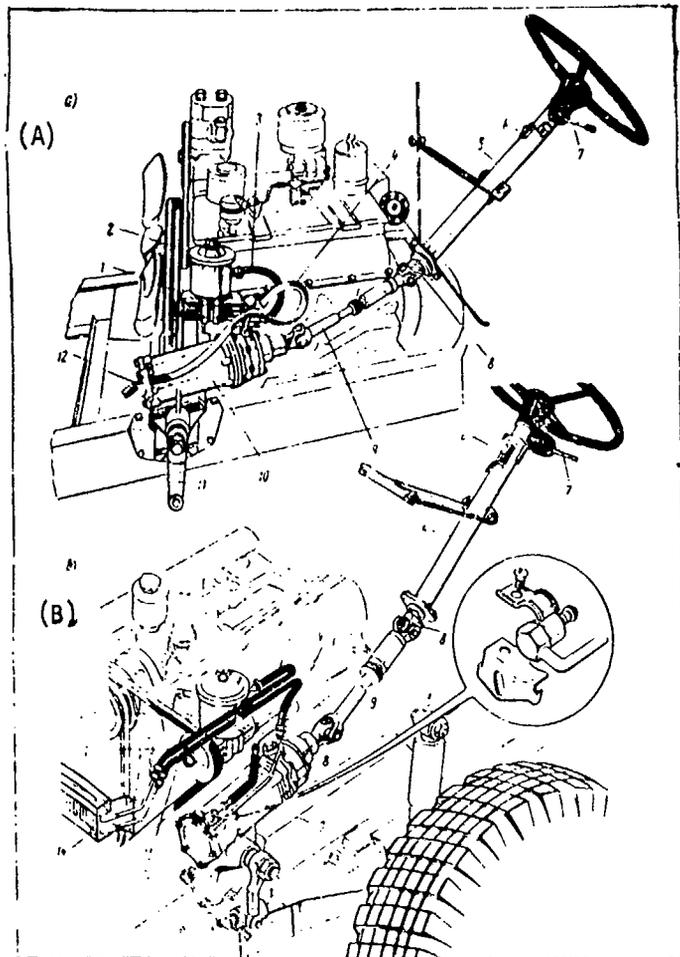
Overall view of the steering control for (A) a ZIL-130 and (B) a ZIL-131
